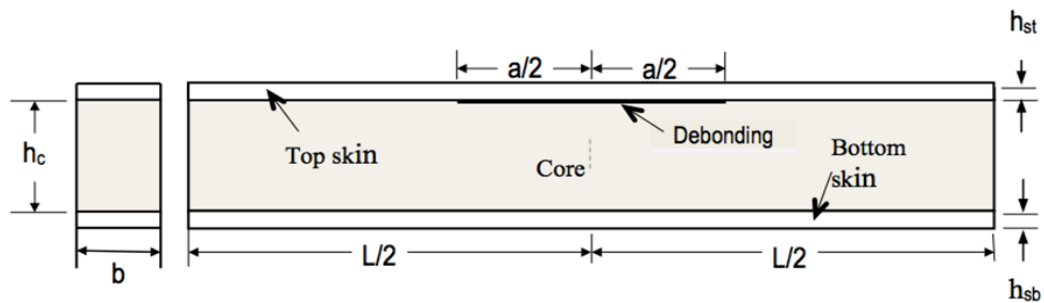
Longitudinal and cross sections of the sandwich beam with a central Debonding
